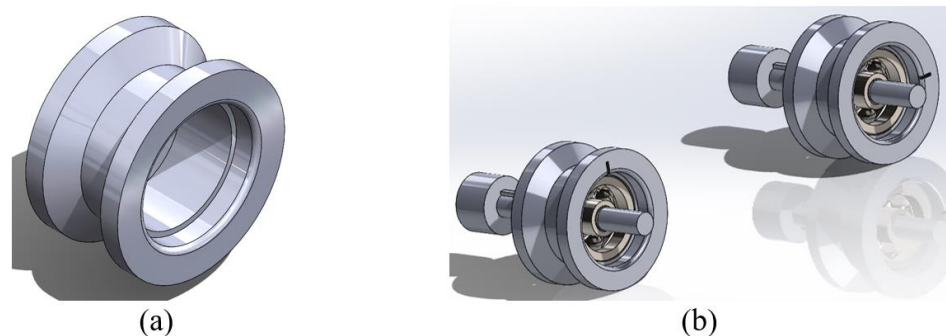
Design of a) Roller and b) Rollers with bearing and shafts
